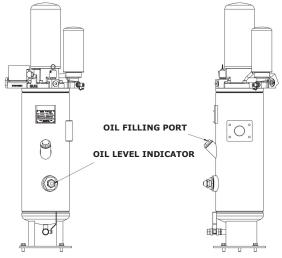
Oil filling and oil level indicator location on air oil seperator tank
